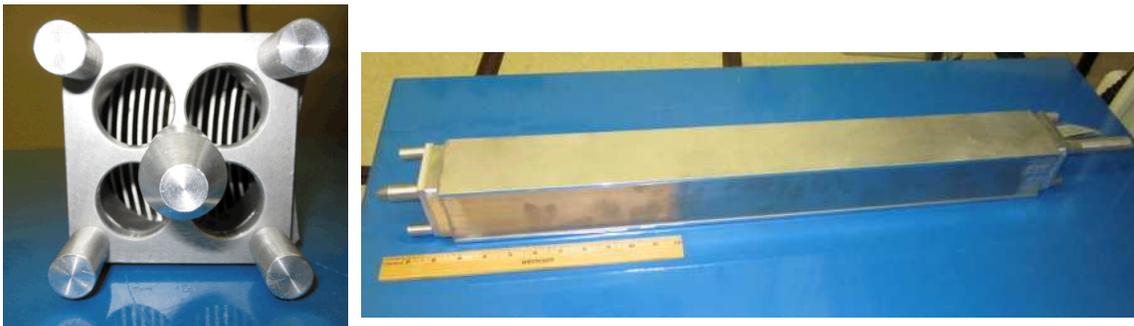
Photograph Showing Cross Section (right) and Full-Length View (left) of an Aluminum Mock Assembly with Positioning Fixtures on the Top and Bottom.
